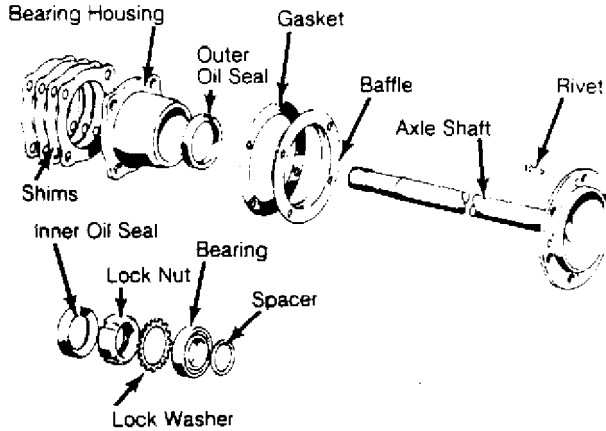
Exploded View of Axle Shaft Assembly for Pickups
